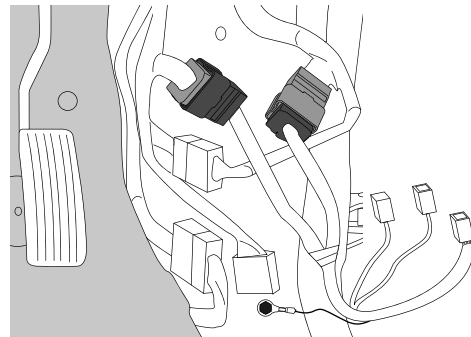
ATTACH THE EYELET ON THE T-CONNECTOR TO THE VEHICLE EARTH TERMINAL BY REMOVING THE BOLT, ATTACHING THE EYELET AND THEN REPLACING THE BOLT.
